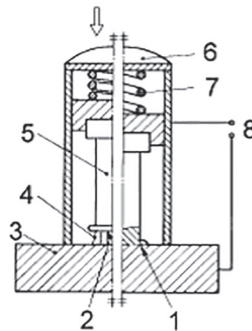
Capacitor discharge drawn arc stud welding2.2.1.4.7capacitor discharge stud welding with tip ignition
